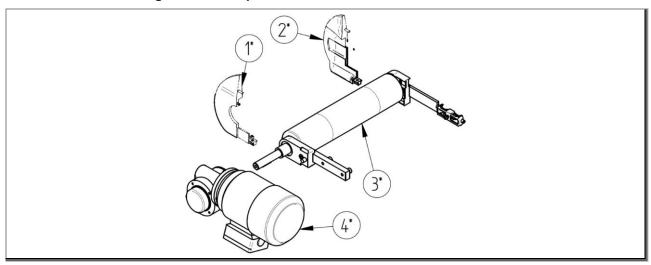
Parts list: Flange drive unit - position of drive unit 14 - ZZ.900.0149.00
